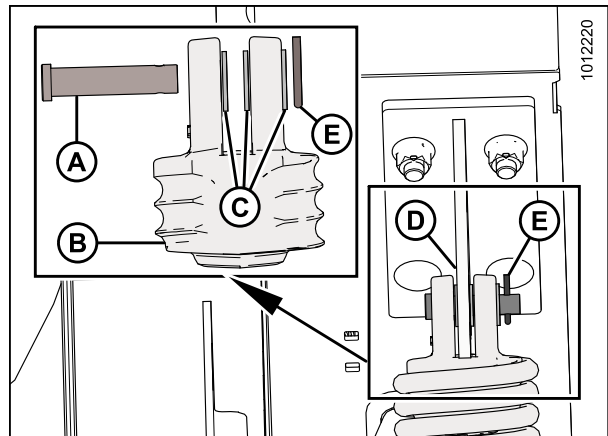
Left Side Spring Float Assembly Shown – Right Side Opposite
